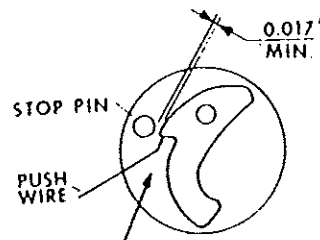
Checking Flyweight to Stop Pin Clearance, Recessed Impulse Coupling
